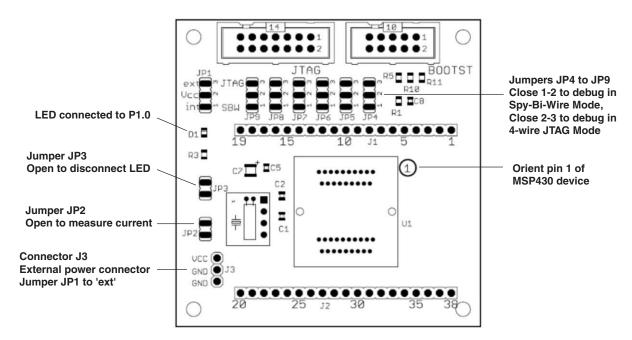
MSP-TS430DA38 Target Socket Module, PCB
